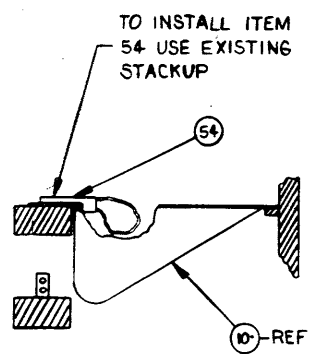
Logic and Option Drawer Assembly (D70030064, Rev Z, Sheet 3 of 4)
